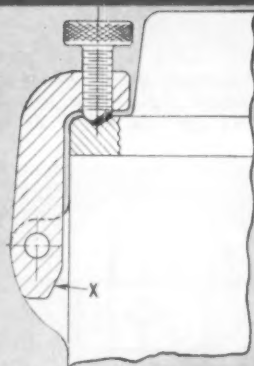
Drawing showing design of clamping arm for holding on cover firmly.
